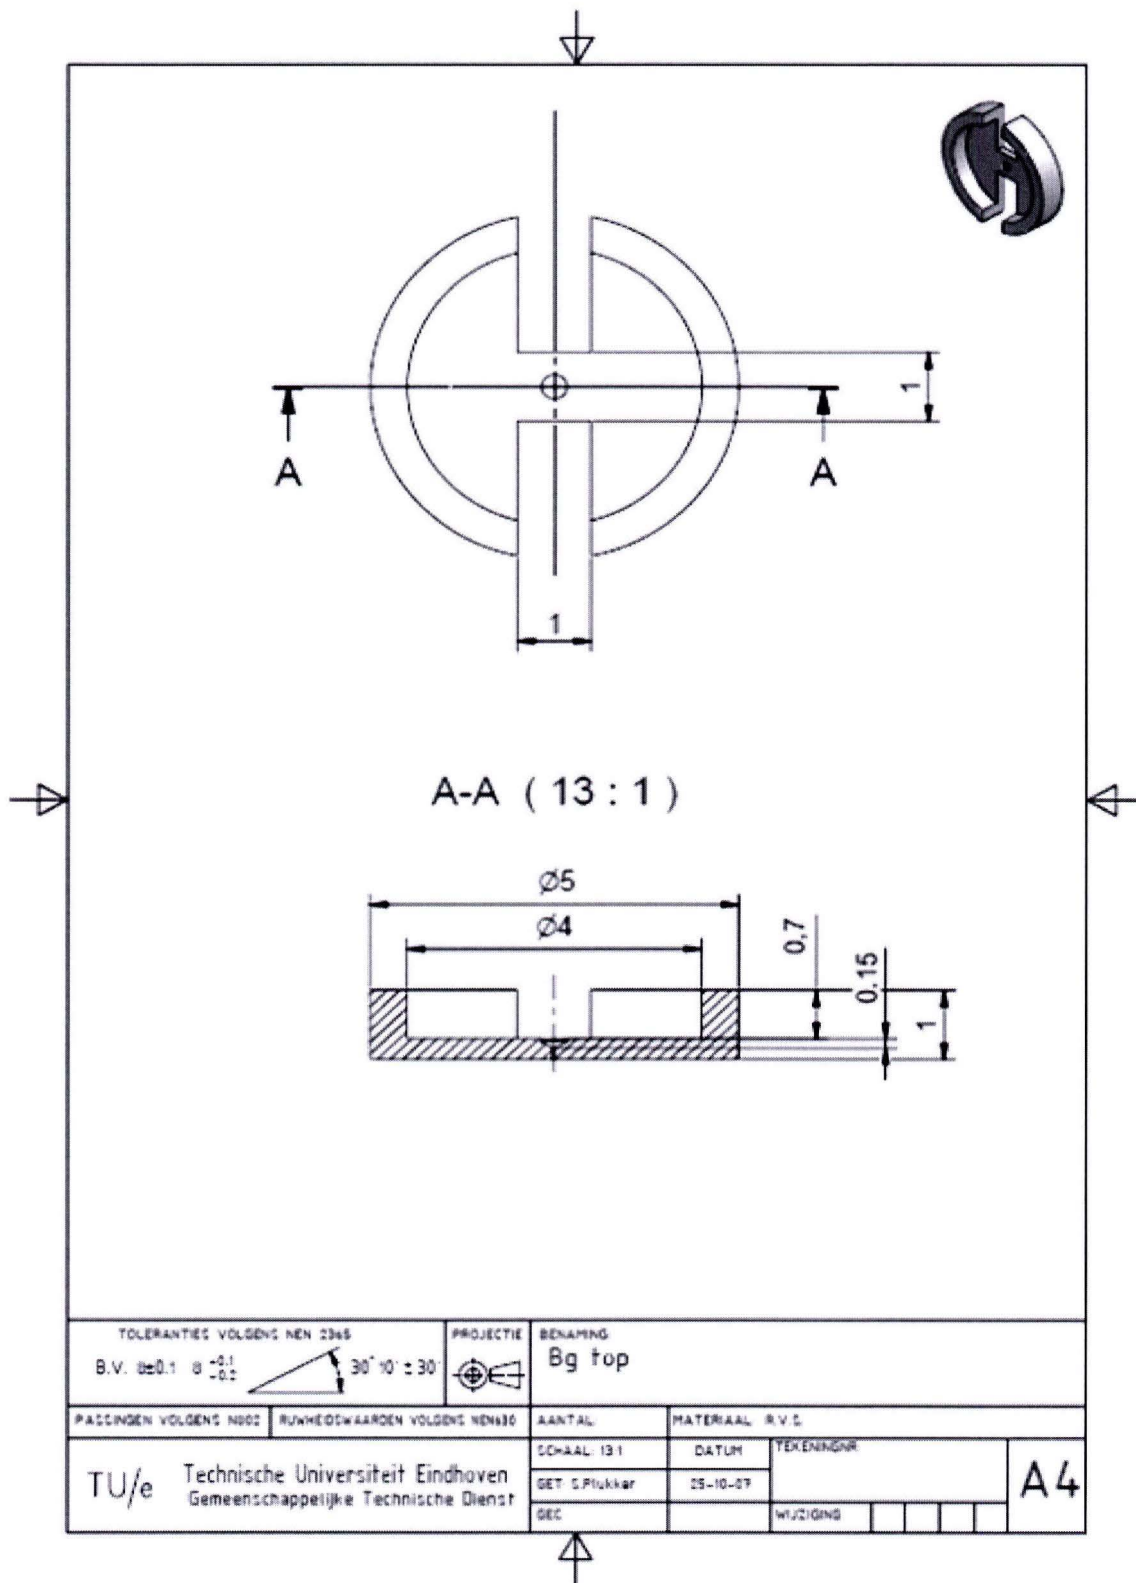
Technical drawing of the stainless steel bubble generator (overview)
